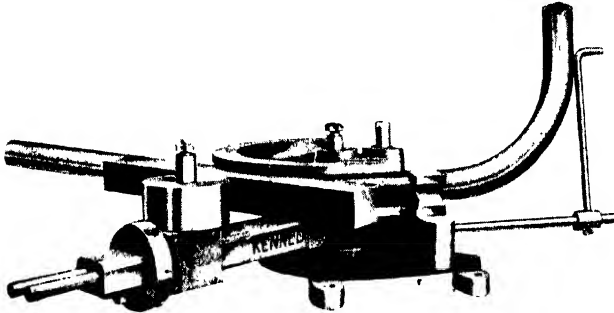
DIRECT MILL BENDER FOR BENDING LIGHT-GAUGE TUBES UP TO 2 IN. DIAMETER
